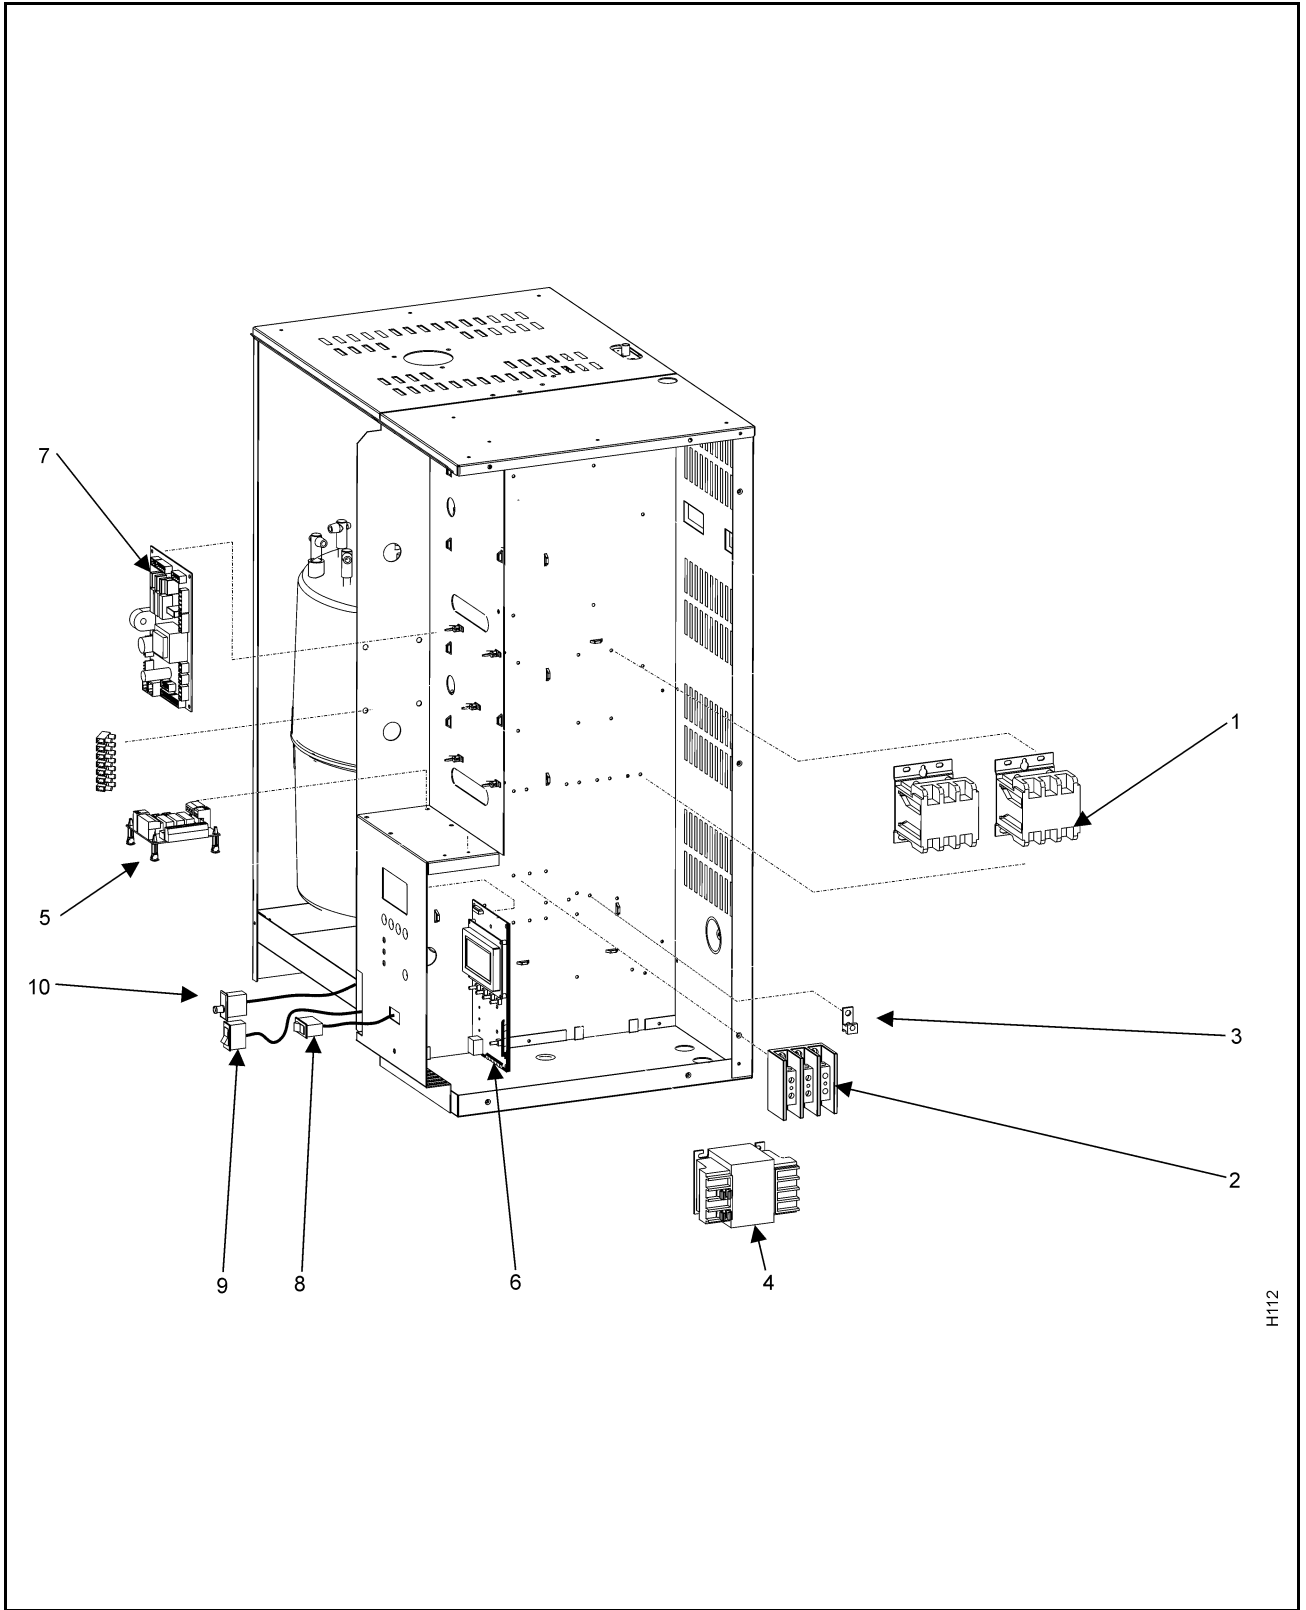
NHTC/NHPC Plumbing Compartment Exploded View and Spare Parts
